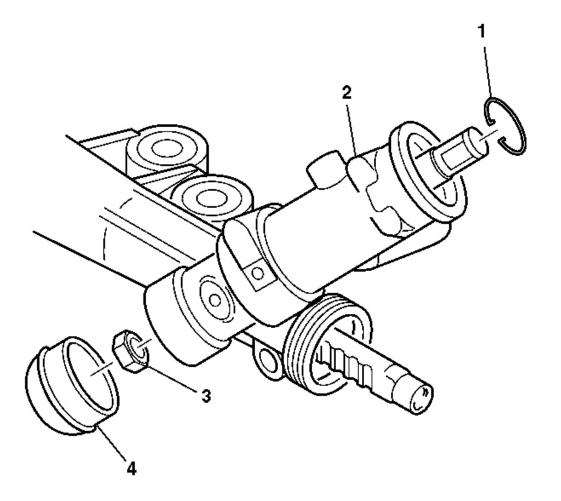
View Of Hex Lock Nut At Lower End Of Pinion & Valve Assembly Courtesy of GENERAL MOTORS CORP.
